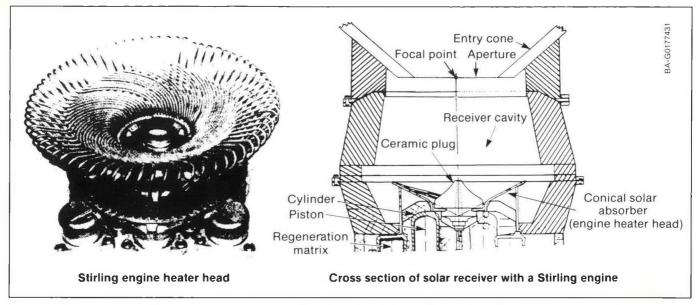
Cavity receiver incorporating the United Stirling Model 4-95 engine heater head
